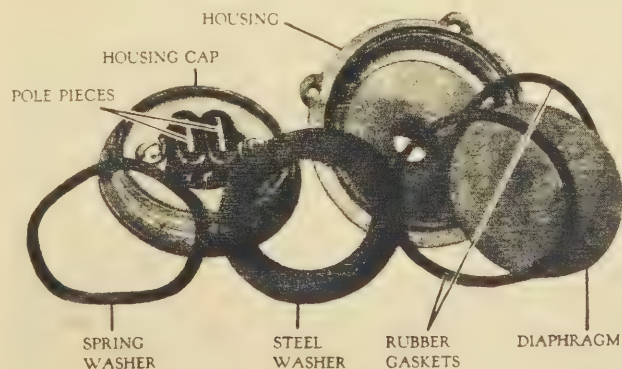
HORN TYPE UNIT, DISASSEMBLED.
